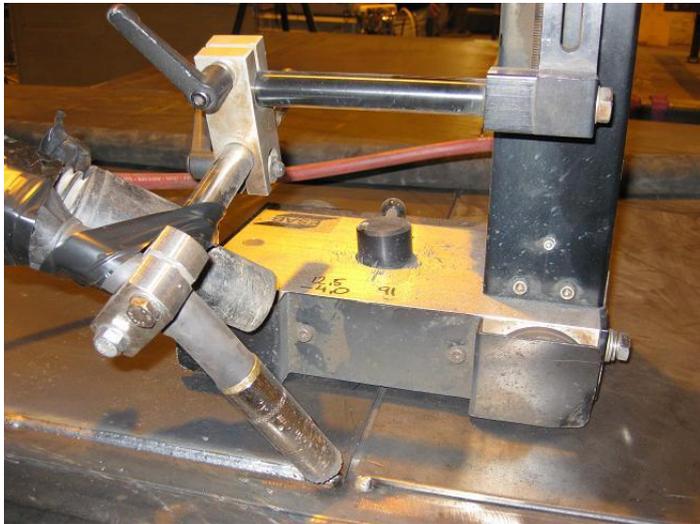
The welding tractor with a provisionally arranged exhaust on the welding pistol.
